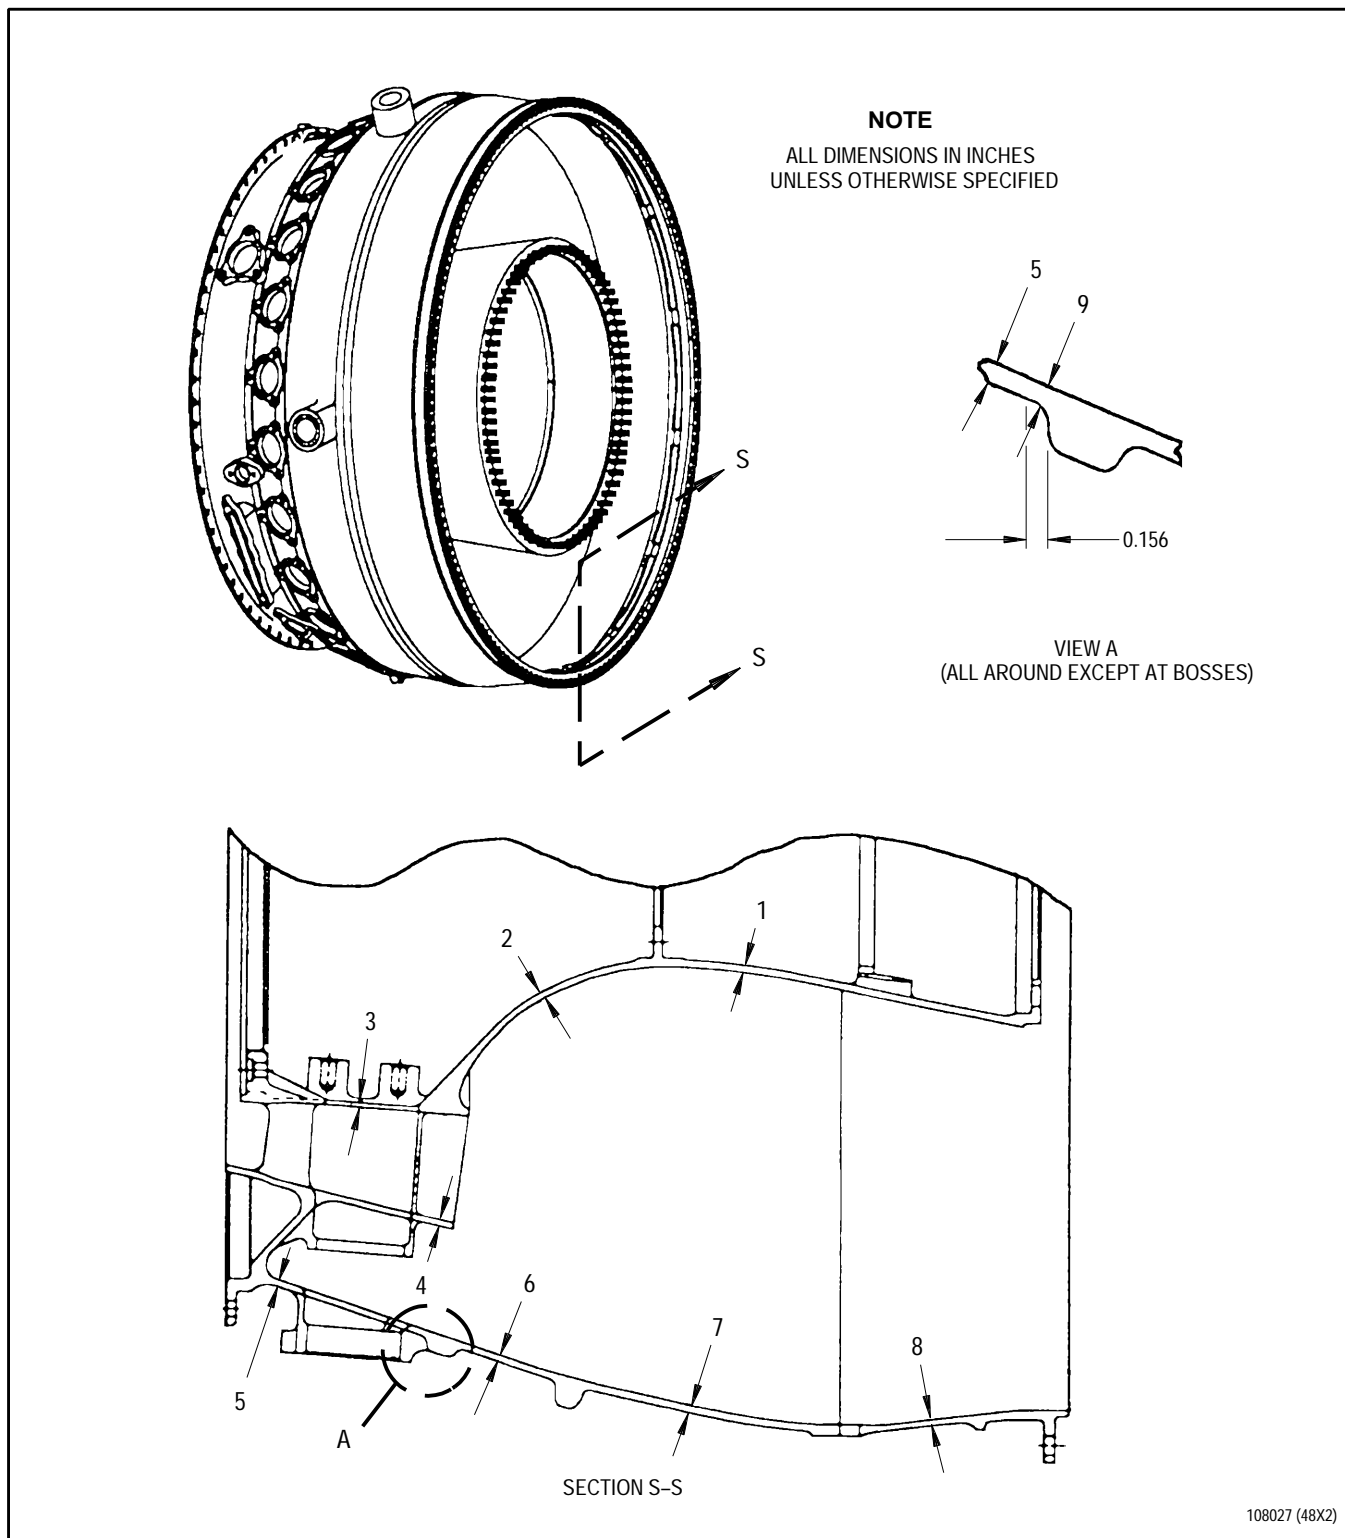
Diffuser Case Assembly - Inside and Outside Diameter Surface Damage Blend Limits
